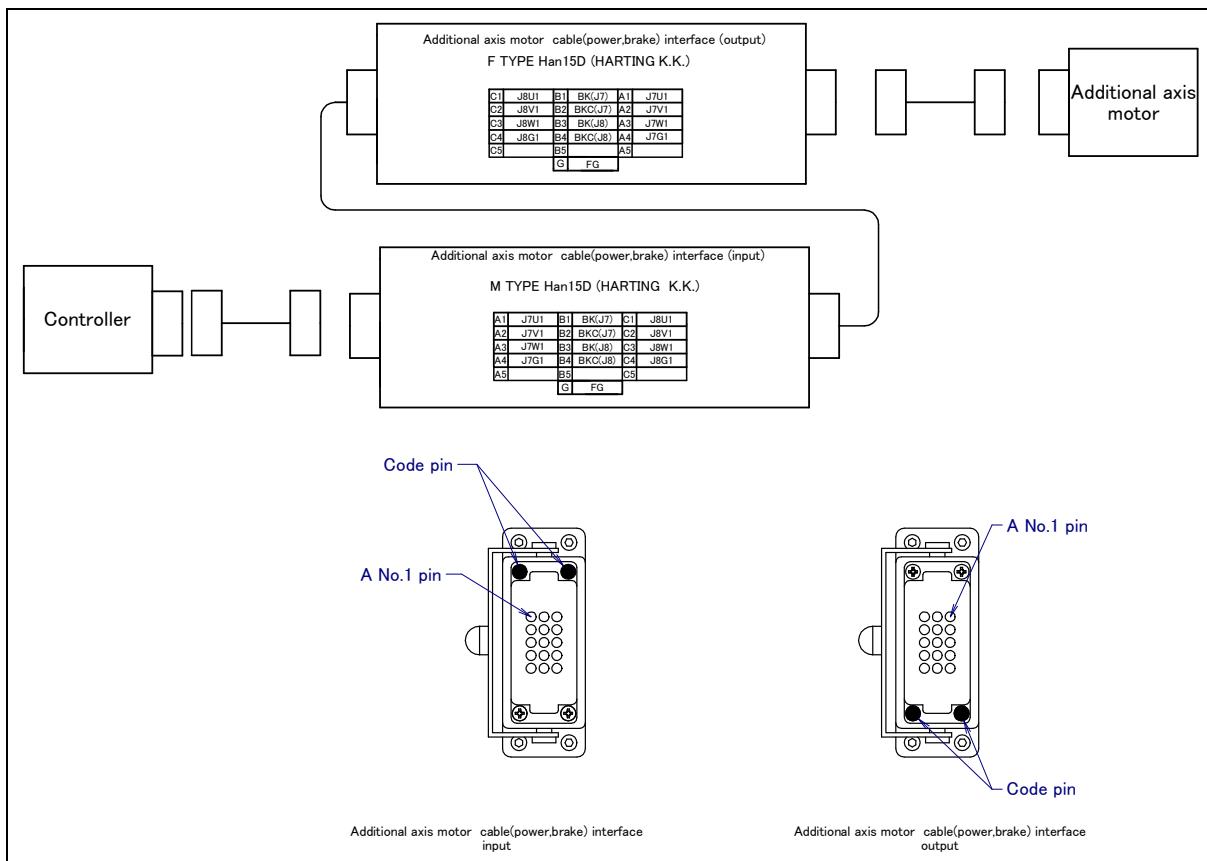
(t) Pin layout of the additional axis motor cable (power and brake cables) (ARM) interface and layout position of the code pin (option)
